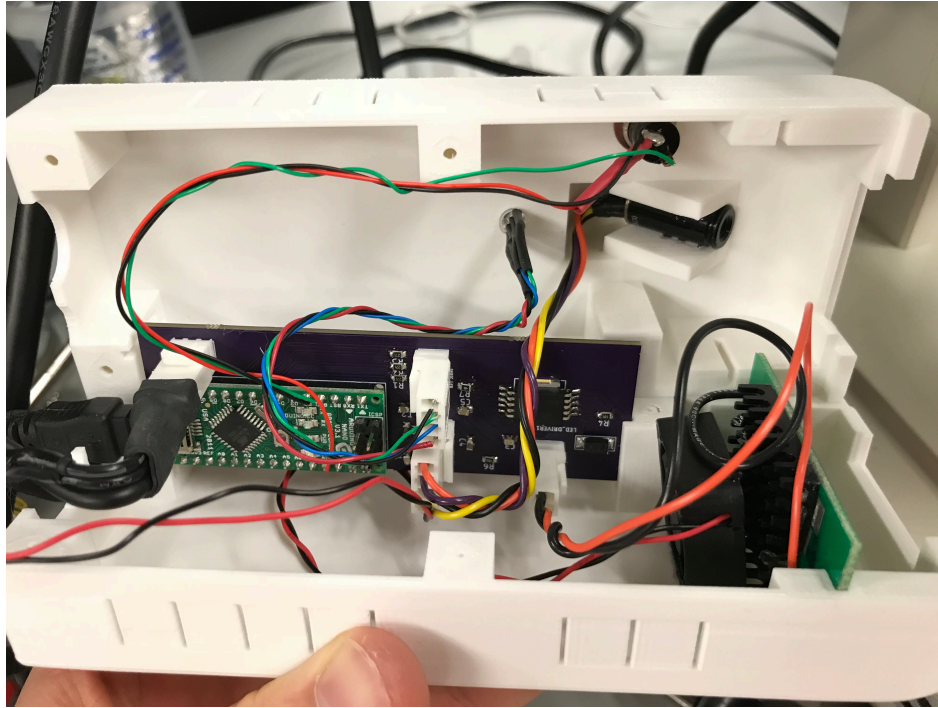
UnTape Wand 2nd Gen Internal Assembly
